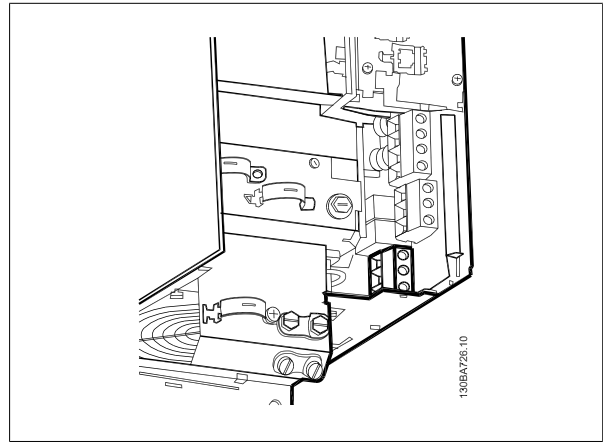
Motor connection for for unit size 23 IP20 Open Chassis drive type (230V, 7.5 to 10HP, 460V/575V, 15 to 25HP).
